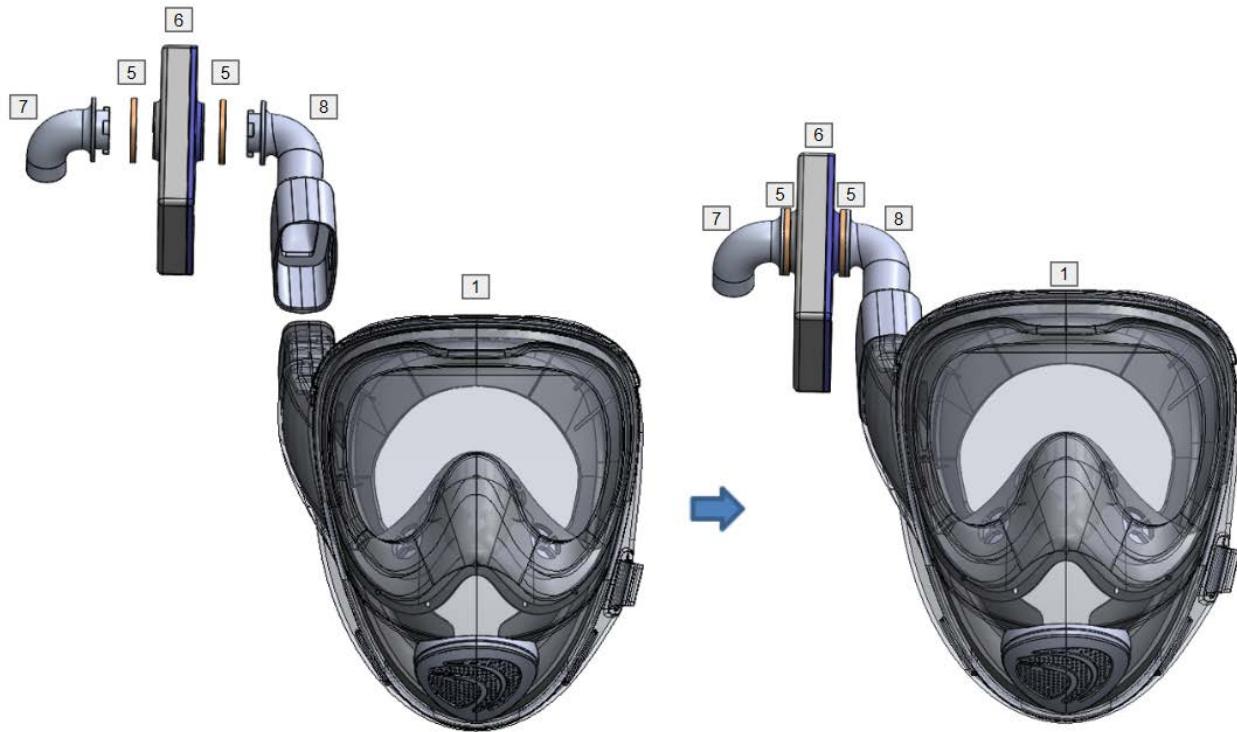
Snorkel Mask and Filter Assembly With Adapters
